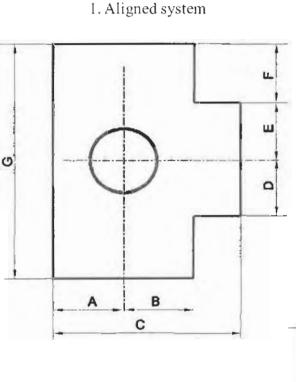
Size and locating dimensions S - Size dimensions L - Locating dimension
